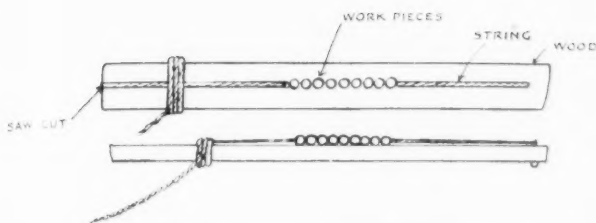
For bead-like pieces, a long narrow piece of wood holds the parts firmly after threading them on a string.
